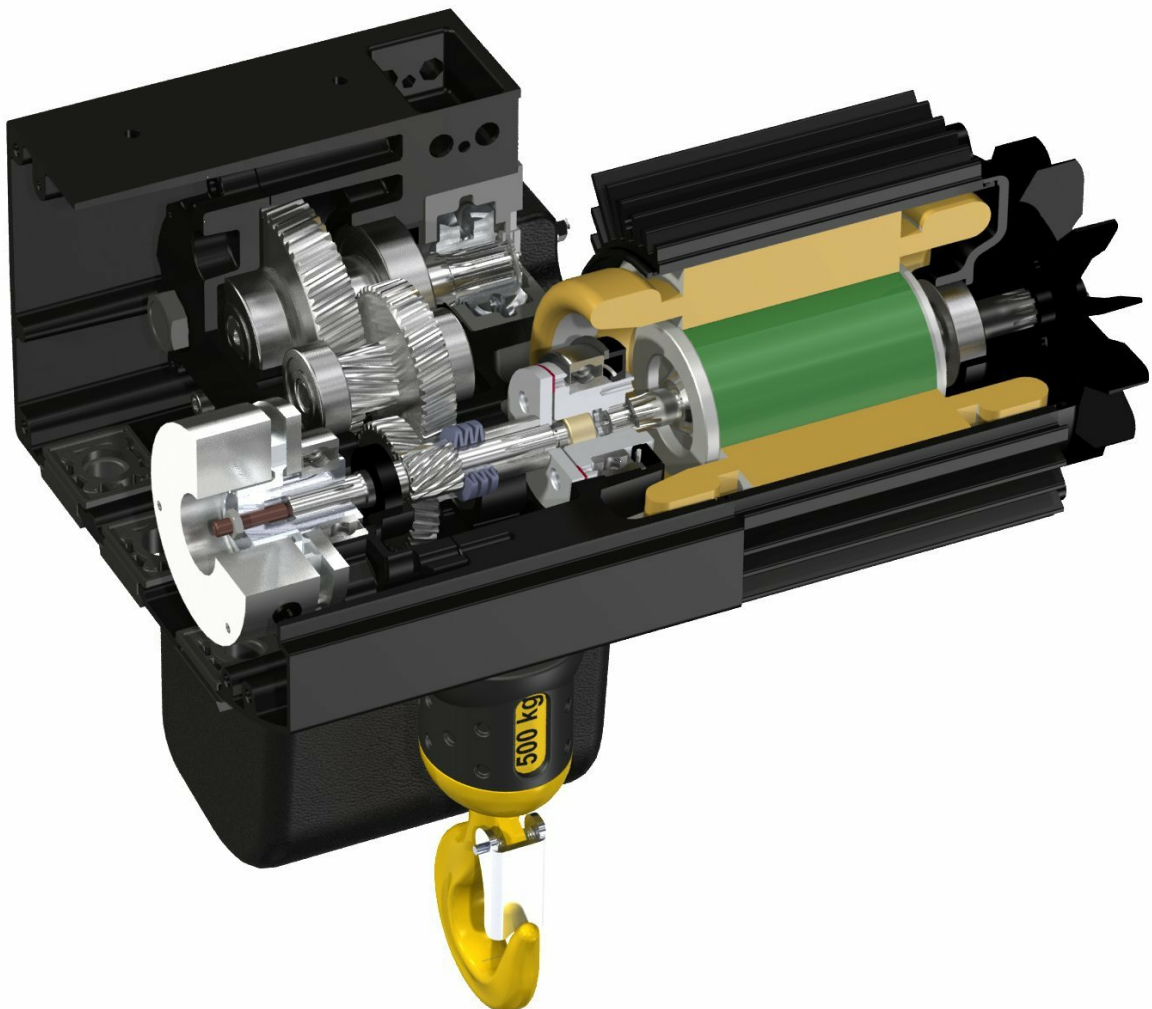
A cutaway view showing the internal motor and gear assembly, highlighting the precision engineering of the drive system.
